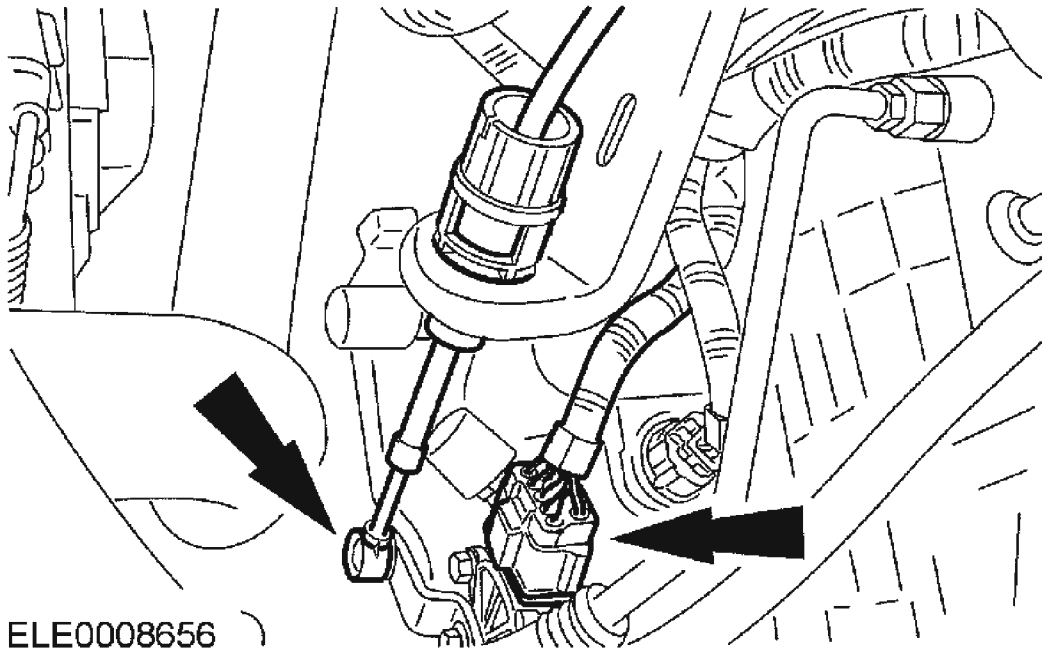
Connecting Selector Lever Cable And TR Sensor Electrical Connector
